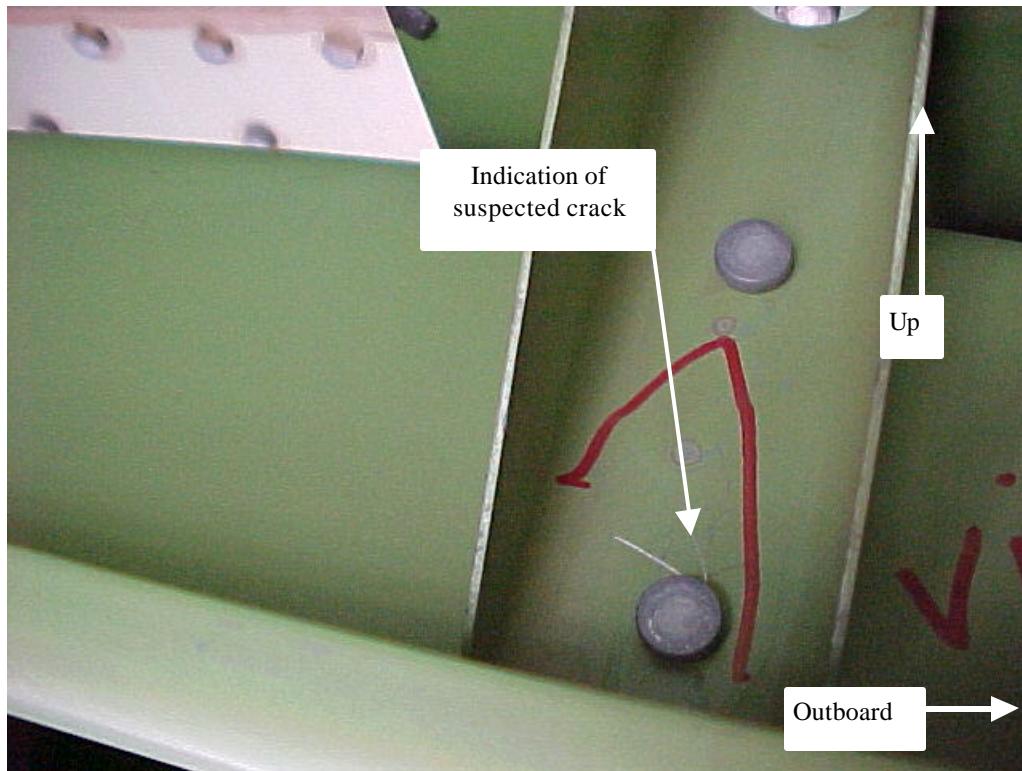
Photograph of stringer clip at FS 680, stringer 3R. Detailed visual inspection discovered an indication.
